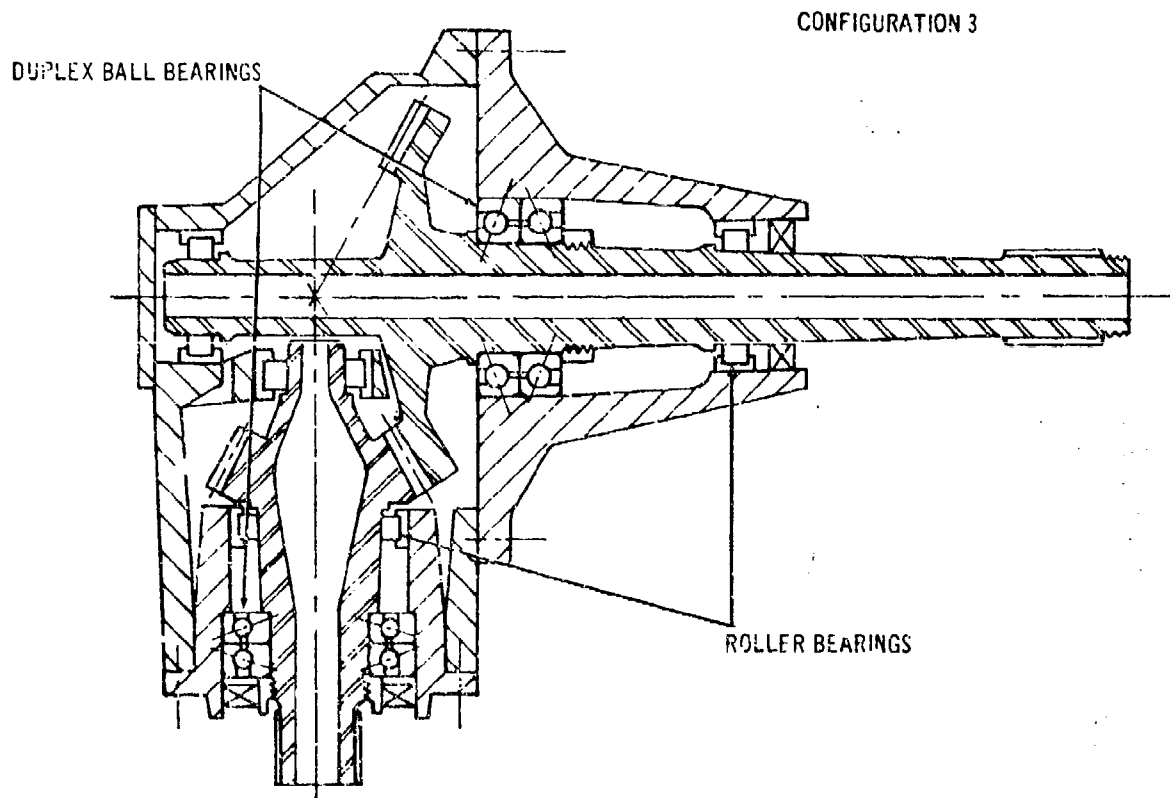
Tall Rotor Gearbox — 12.7 mm Proof
